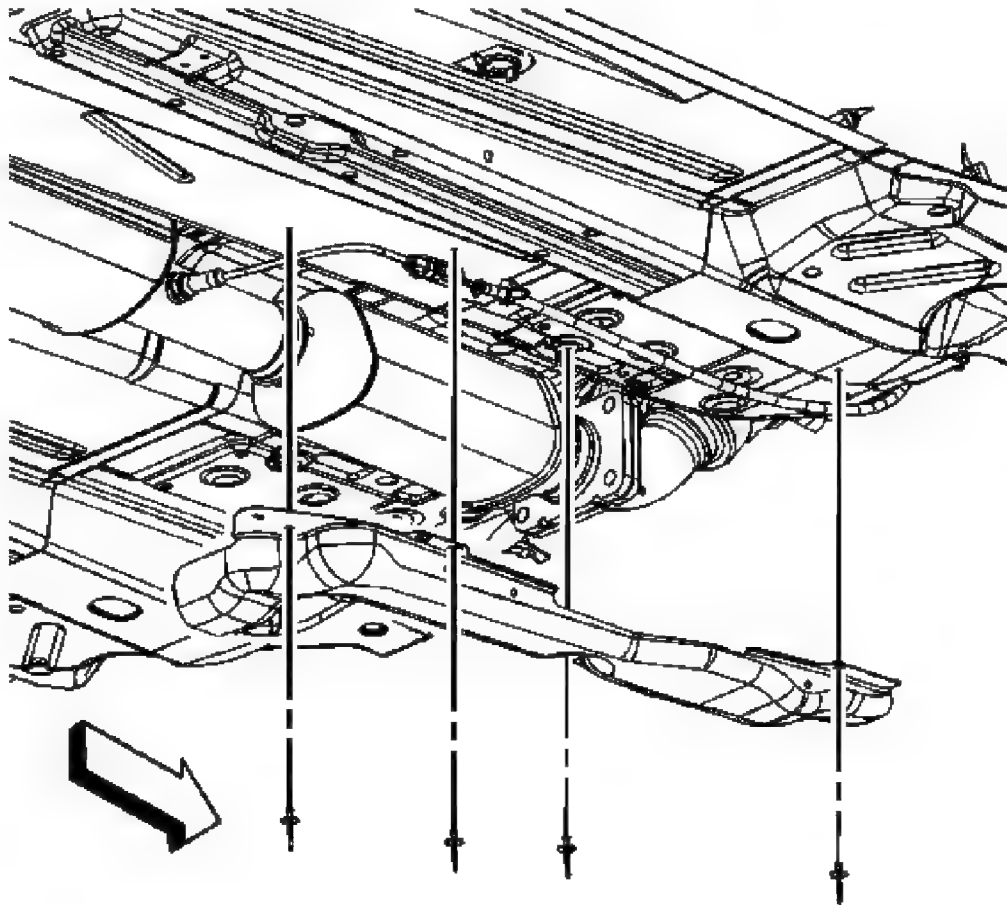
View Of Oxygen Sensor Wiring Harness Heat Shield
